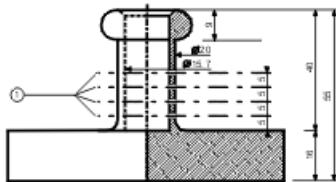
Hollow bronze cylinder, dimensions in mm
